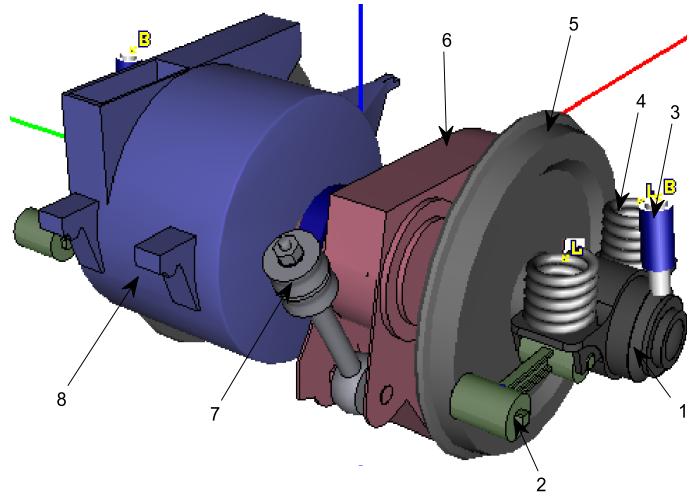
Model of wheelset-motor assembly (WMA): axle-box (1), traction rod (2), damper (3), primary suspension (4), wheel (5), reduction gearbox (6), reducer suspension rod (7), traction motor (8)
